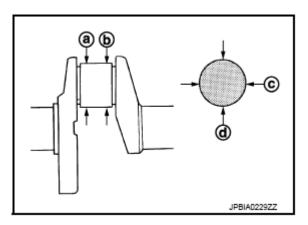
Identifying Connecting Rod Main Bearing Courtesy of NISSAN NORTH AMERICA, INC.
